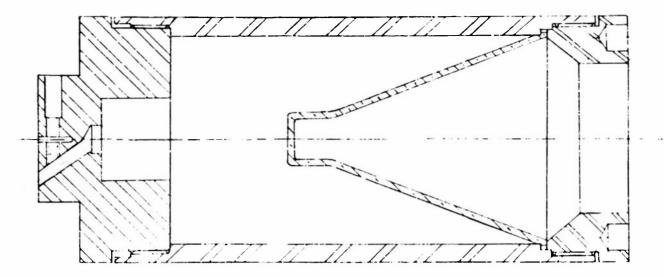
DRC505 Penetration Test Assembly. Scaled Counterpart of DRC376 Test Assembly.
